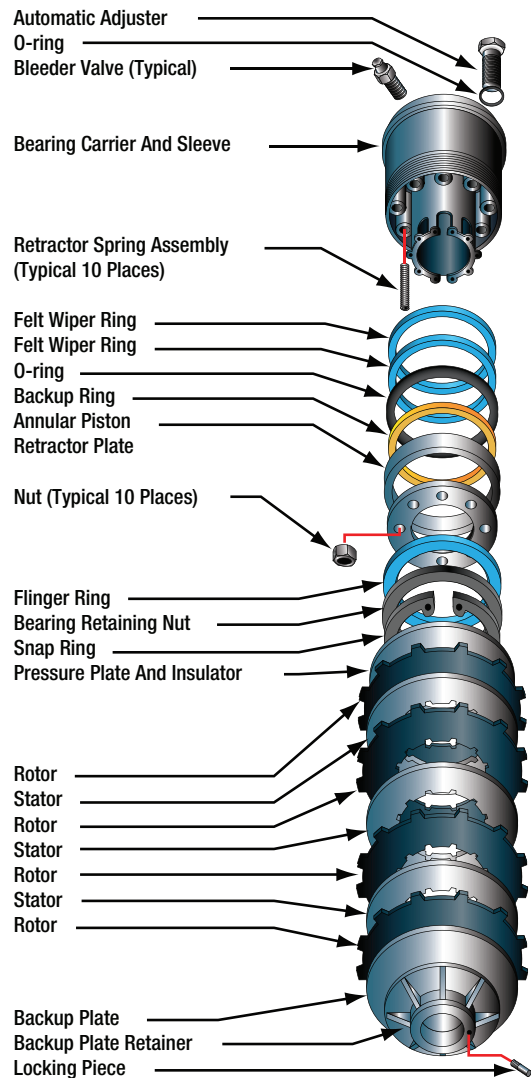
A multiple disc brake with bearing carrier upon which the parts of the brake are assembled including an annular cylinder and piston assembly that apply pressure evenly to a stack of rotors and stators.
